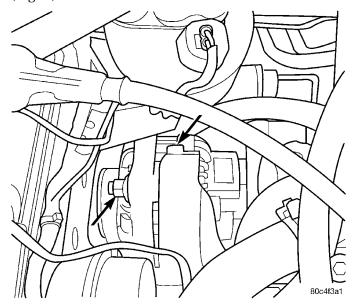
Generator T-Bolt Locknut and Adjustment Bolt
